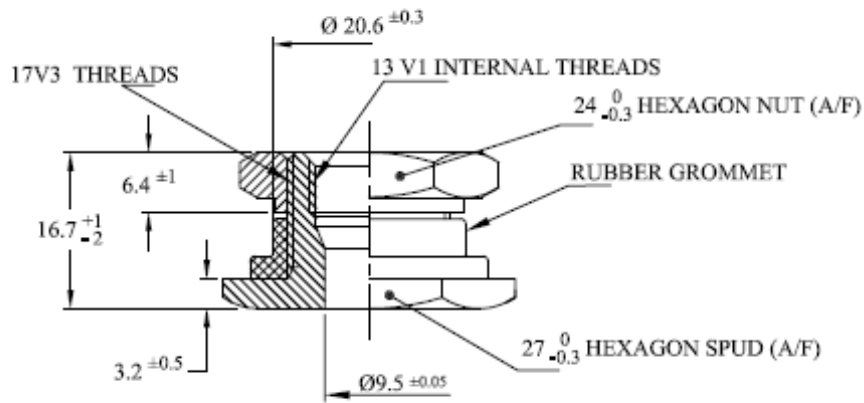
LARGE BORE (OTR) VALVES R 79 6 09 SB AND R B9 6 SB - SWIVEL TYPE SINGLE BEND
